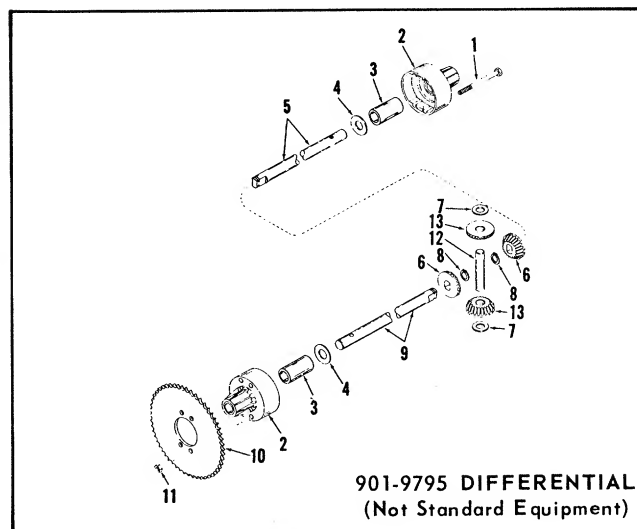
DIFFERENTIAL-EXPLODED VIEW
